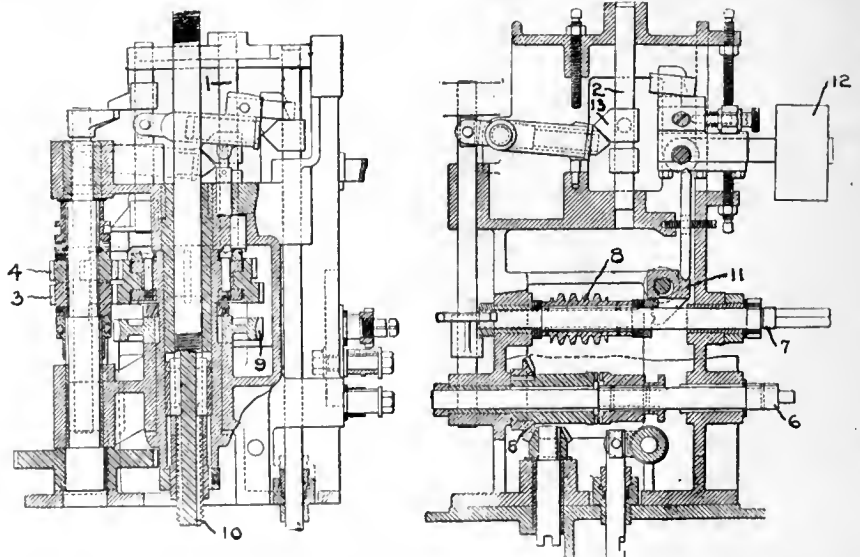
TOOL DEVICES HAVING THE FEATURE OF TRIPPING THE FEED IF PRESSURE ON TOOL BECOMES EXCESSIVE. BULLARD MACHINE TOOL CO.
